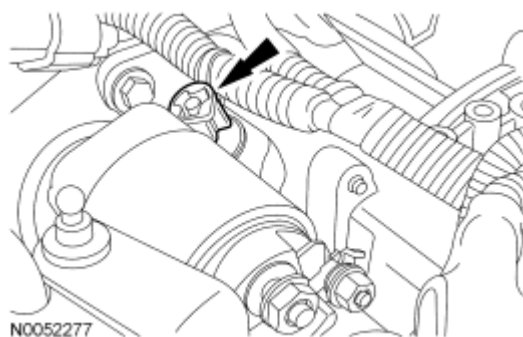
Identifying Wiring Harness Retainer From Starter Motor Stud Bolt
